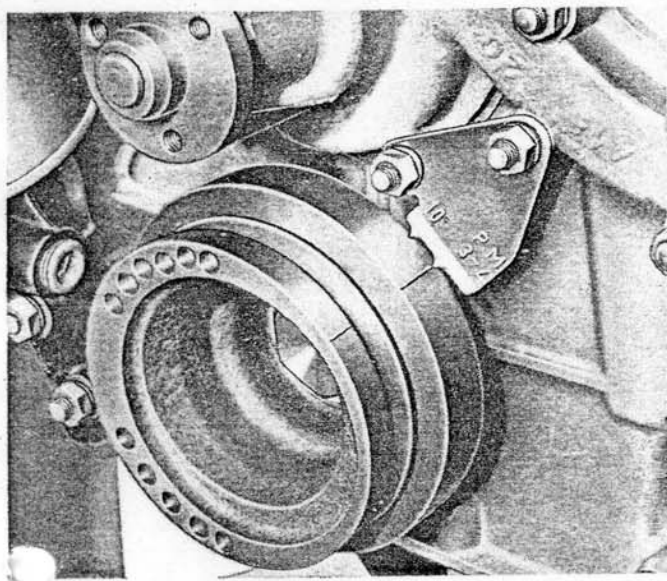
Positioning the crankshaft pulley for valve timing check.
